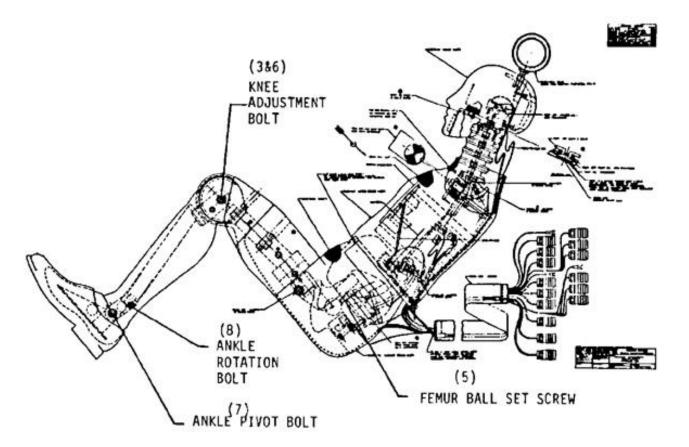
Hybrid III leg and feet joints requiring adjustment
